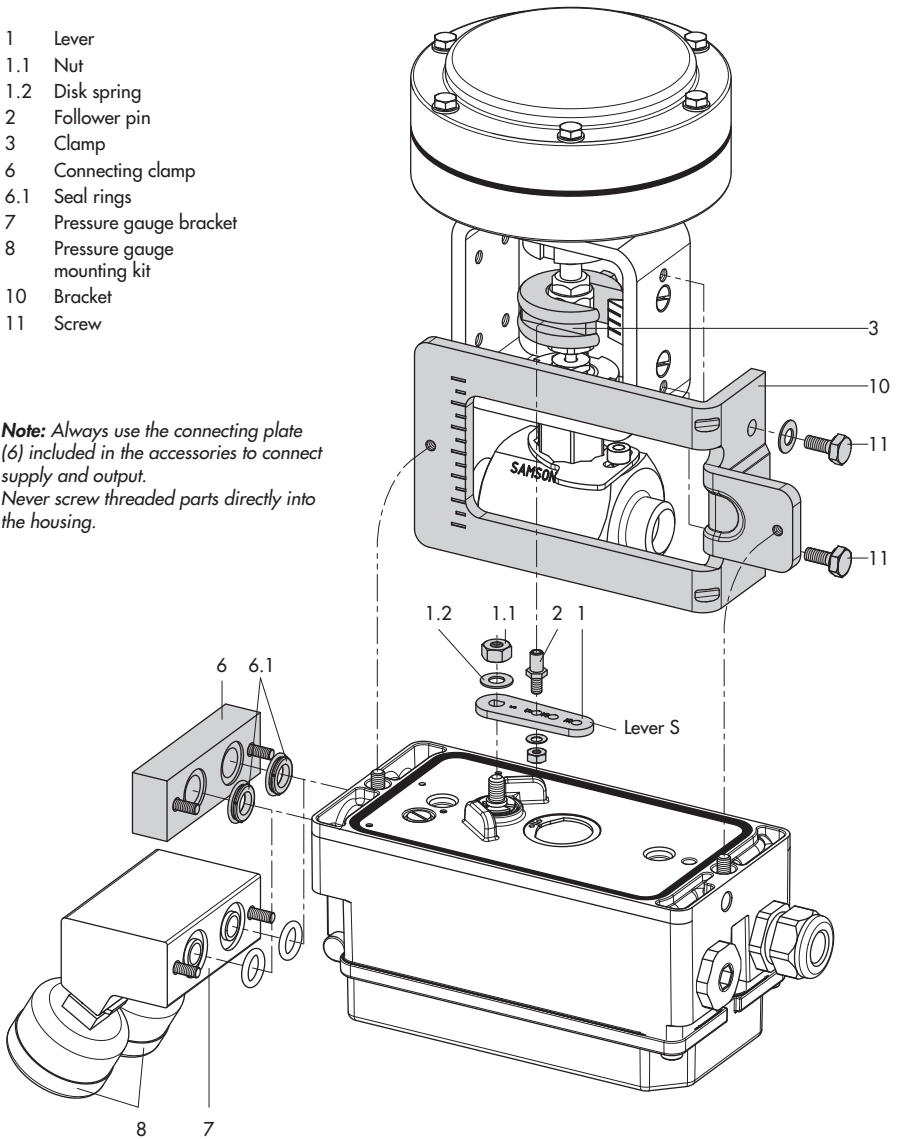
· Attachment to Type 3510 Micro-flow Valve
